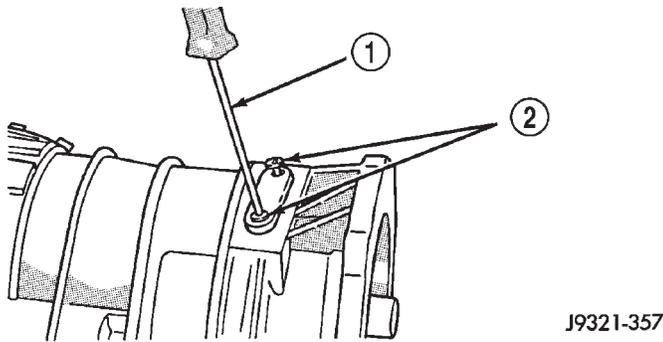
Overdrive Clutch Reaction Snap-Ring Removal
